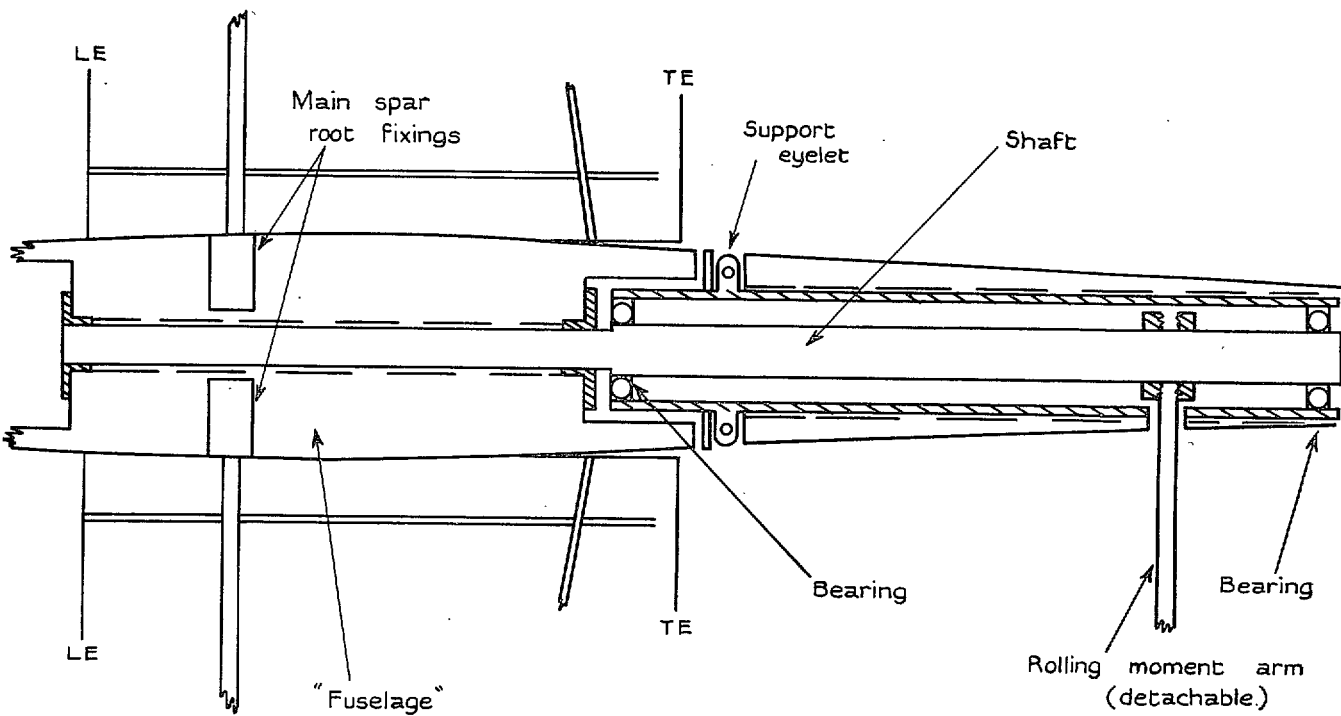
Arrangement of shaft and bearings forming the rolling axis.
